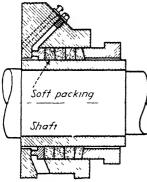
Soft-packing shaft seal for two-impeller compressor.
